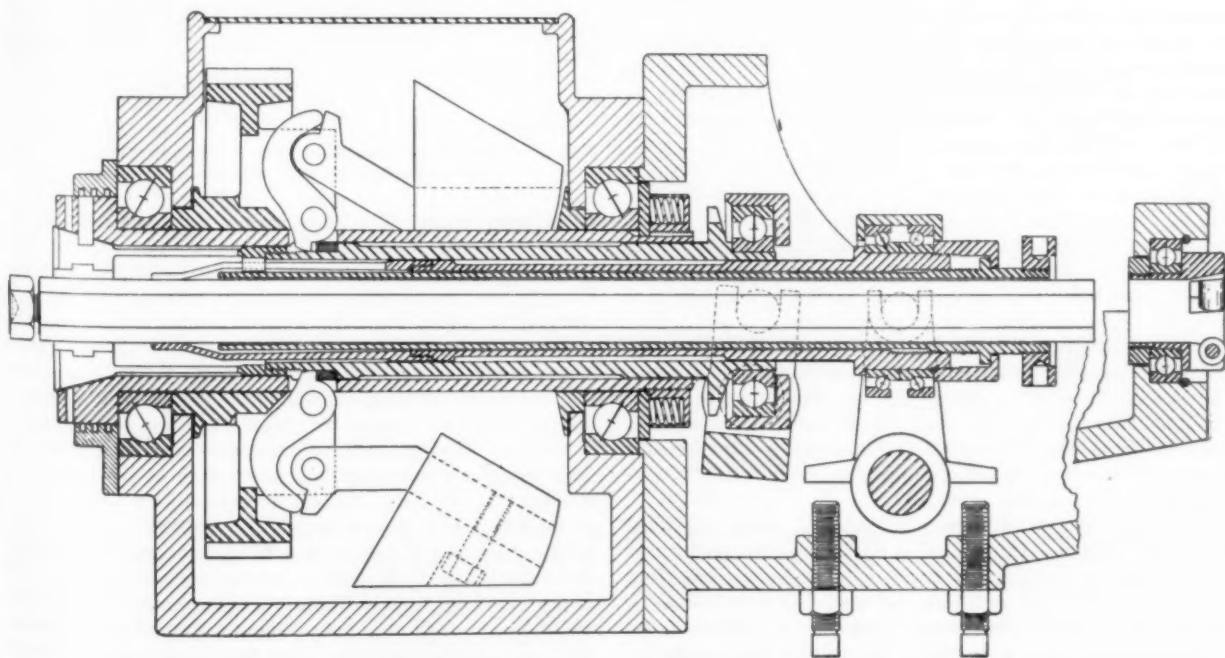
SINGLE-SPINDLE SPECIAL-PURPOSE AUTOMATIC. COMBINATION SPRING AND POSITIVE ADJUSTMENT
